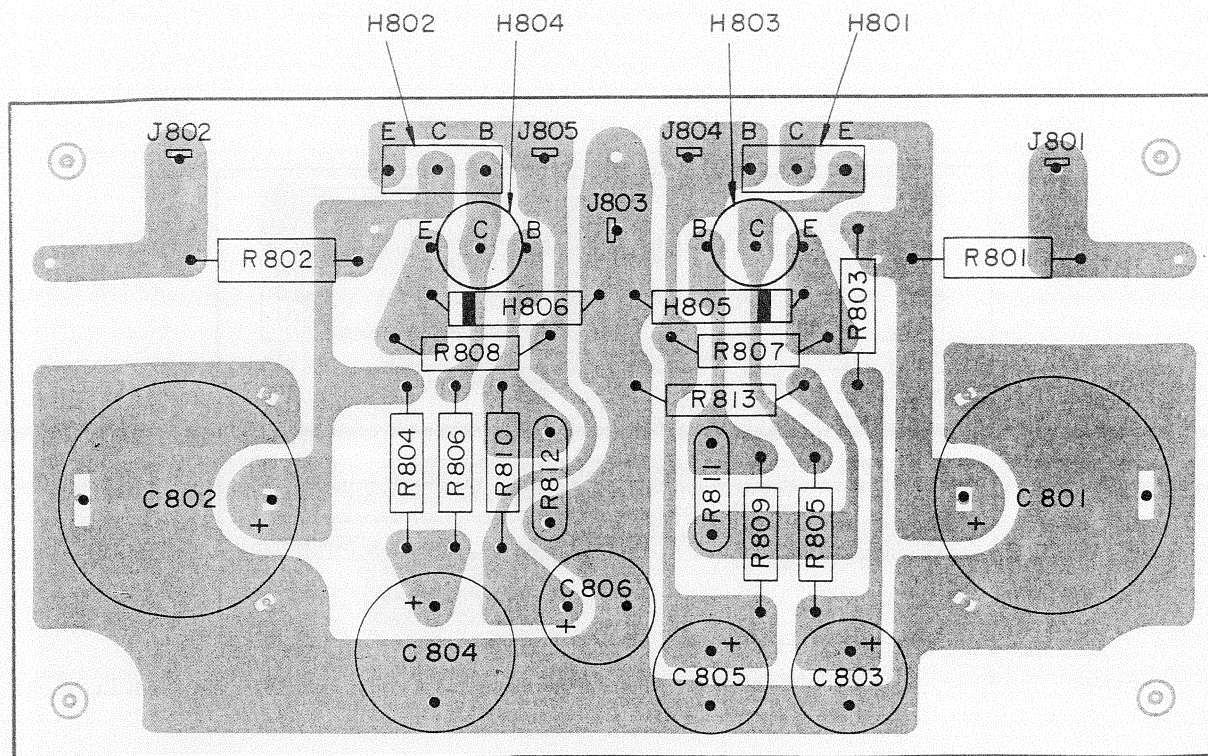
Regulated Power Supply Unit Assembly P800 Component Locations
